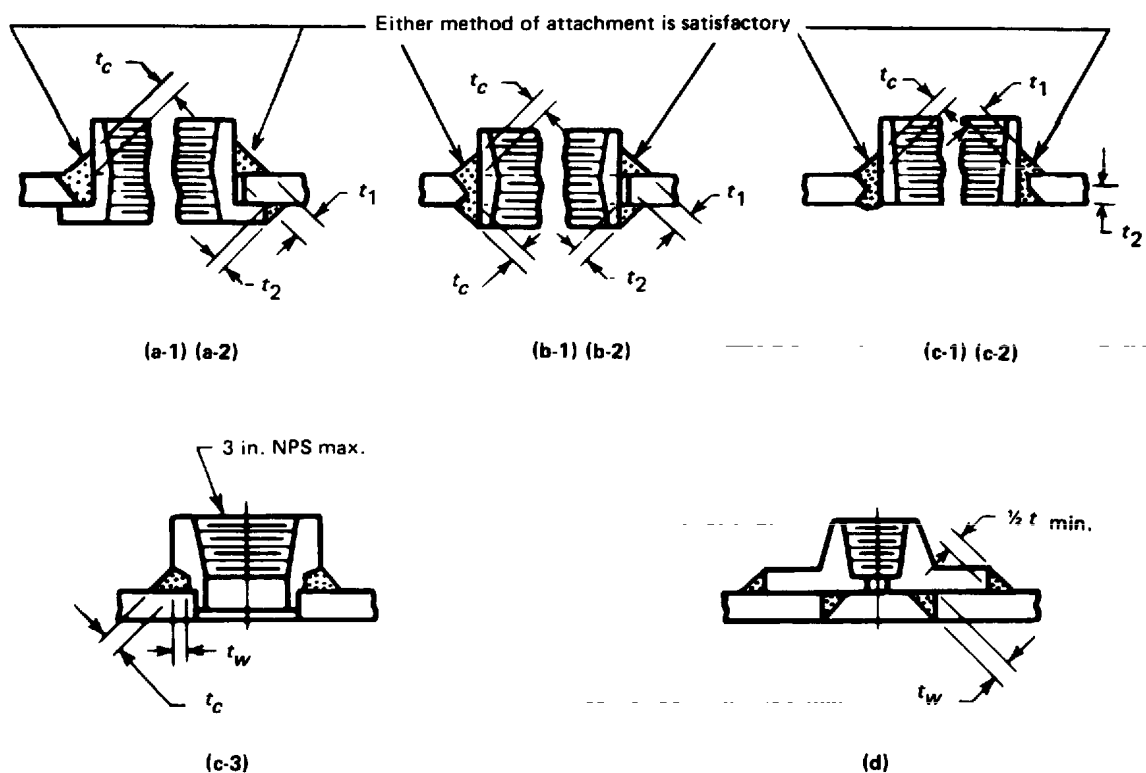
(e)-1 SOME ACCEPTABLE TYPES OF WELDED NOZZLES
